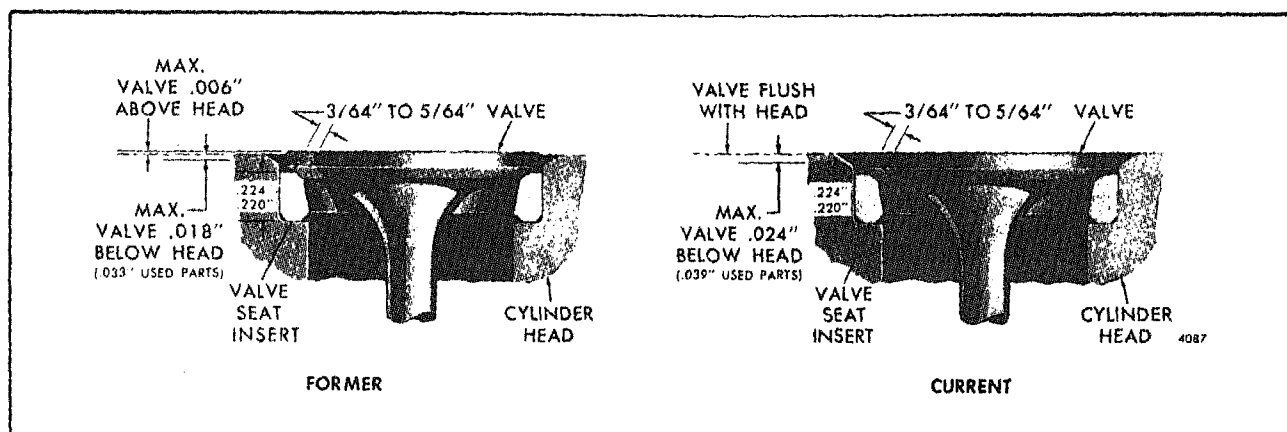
Relationship Between Exhaust Valve, Insert and Cylinder Head (Four Valve Head)
